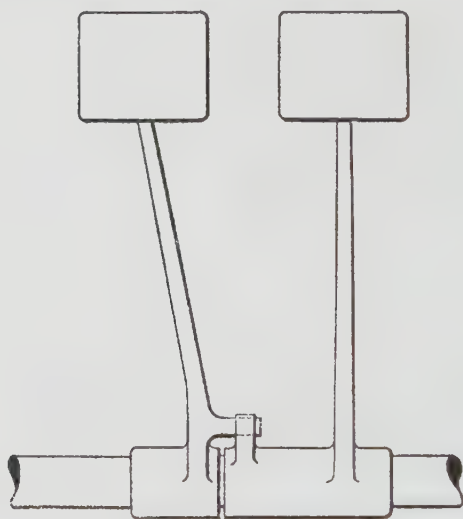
SERVICE BRAKE INTERCONNECTED WITH CLUTCH.
